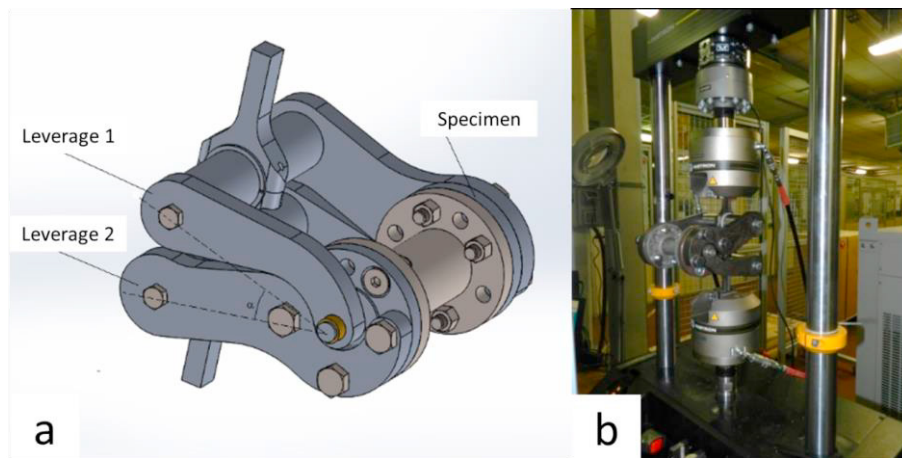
Testing device to apply torque to the spline coupling (a) and fatigue testing machine (b).
